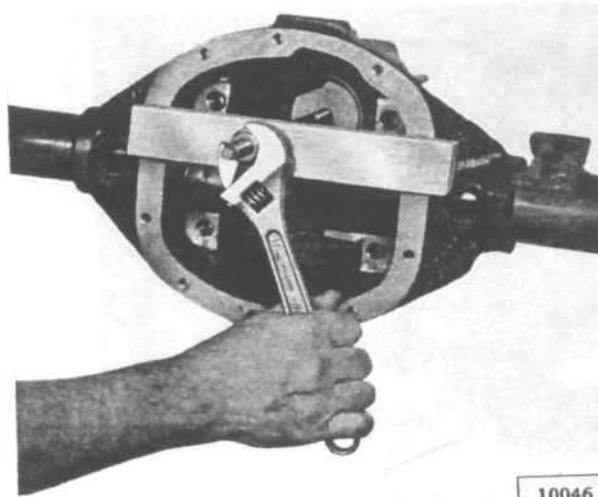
PULLING PINION SHAFT REAR BEARING CUP
